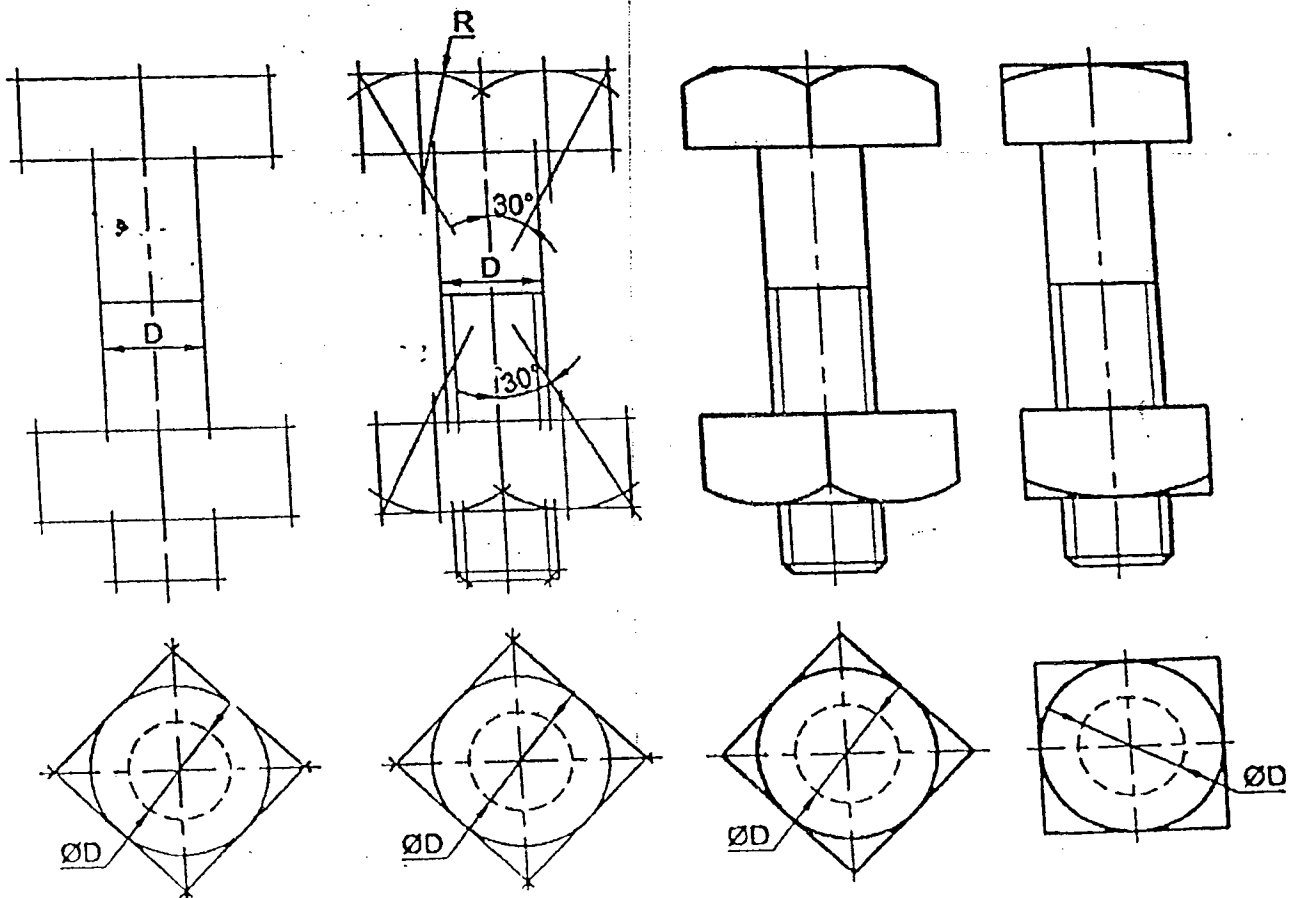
Procedure of Drawing Square Bolt Head and Nut
